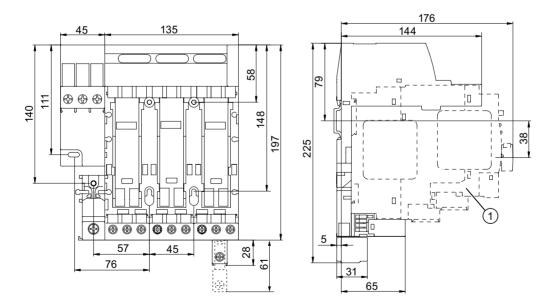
Dimension drawing of screw-type infeed (25/35 mm<sup>2</sup>) featuring outgoing terminals with screw-type connection technology
